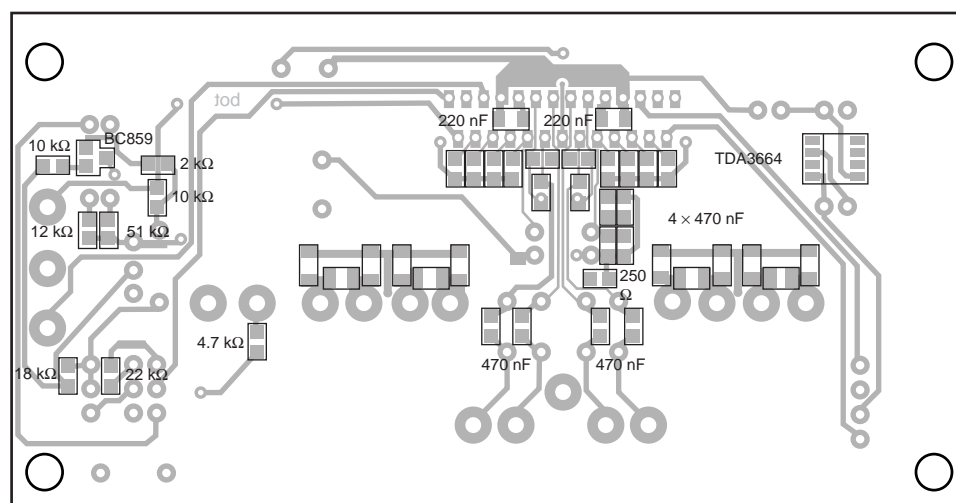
PCB layout of test and application circuit for TDA8595J or TDA8595SD; copper layer bottom (top view)
